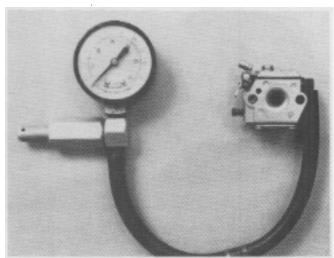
After reassembly is complete attach a pressure gauge to the fuel inlet nipple. Introduce a pressure of 5 - 7 lbs. to check for leaks.
